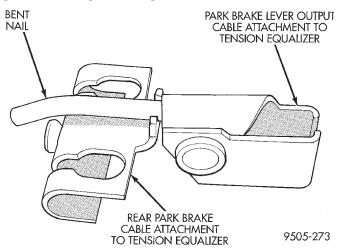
Bent Nail Park Brake Cable Tension Equalizer
